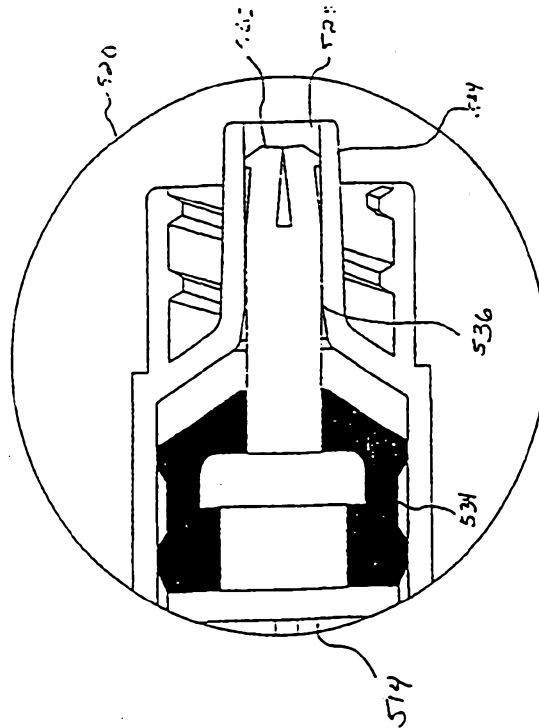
A SIDE VIEW - PRE-ENGAGEMENT POSITION
